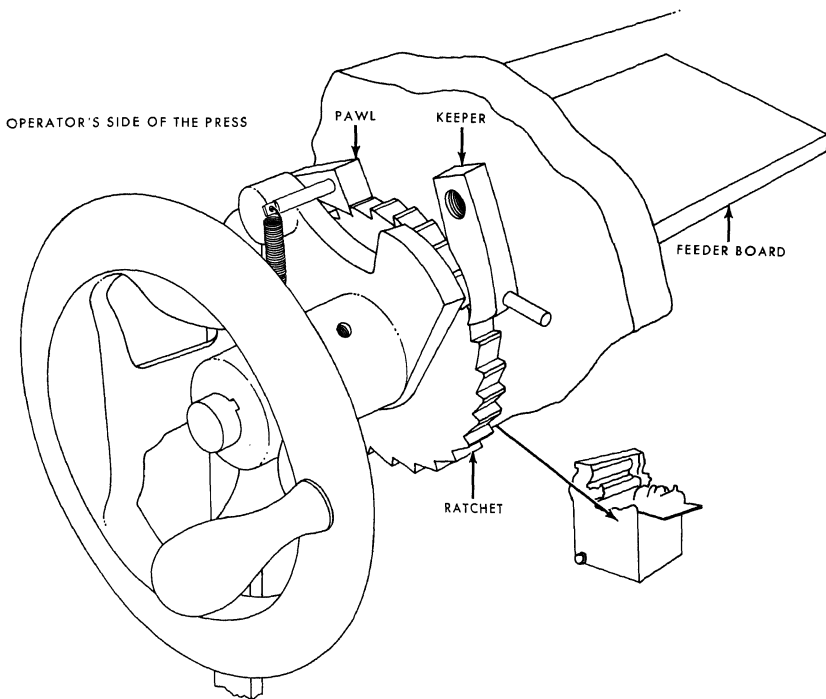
Handwheel for manually raising and lowering feeder board.
